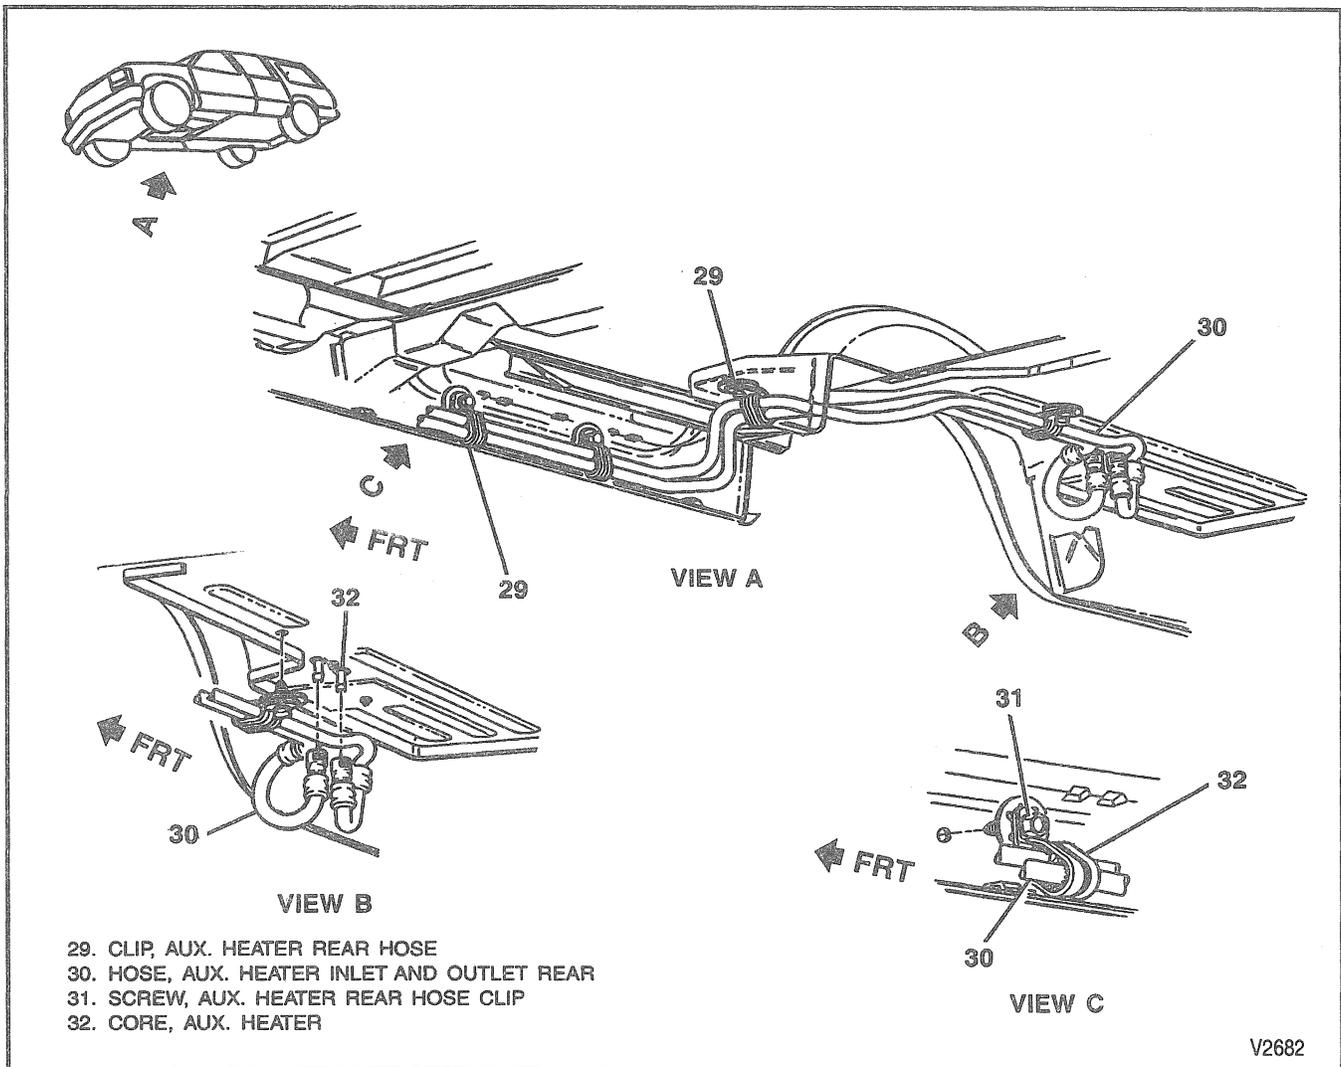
Auxiliary Heater Hose Assembly Routing (Rear)
